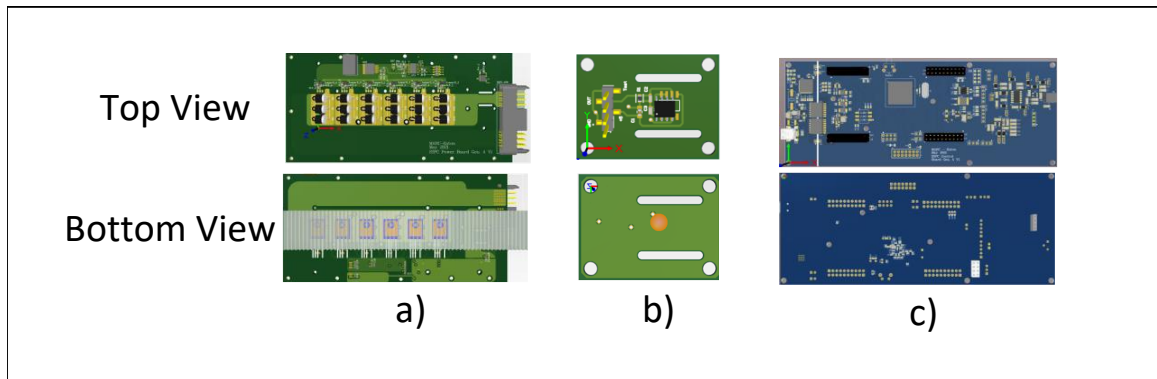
Designed SSPC PCB Assembly. a) Board stack assembly b) SSPC in 3D printed enclosure
